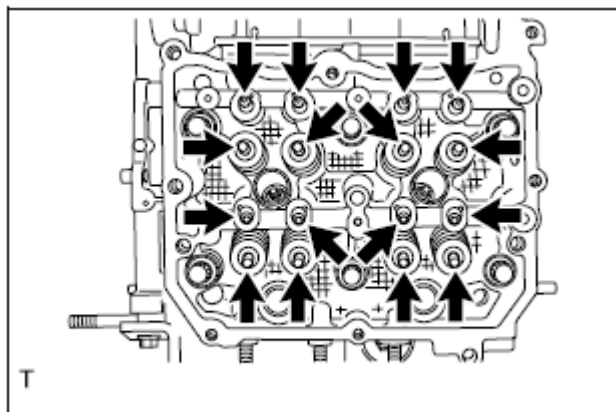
Identifying Cylinder Head Sub-Assembly Valve Adjusting Shims And Roller Rocker Arm Pivot
